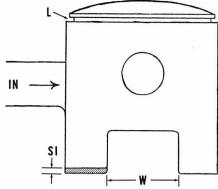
Some pistons designed for high speed operation use an "L" shaped ring. Cutting bottom edge of piston skirt (S1) off will cause inlet port (IN) to open sooner. Slot (W) in lower edge of piston should match with similar openings in cylinder with piston at Bottom Dead Center.
